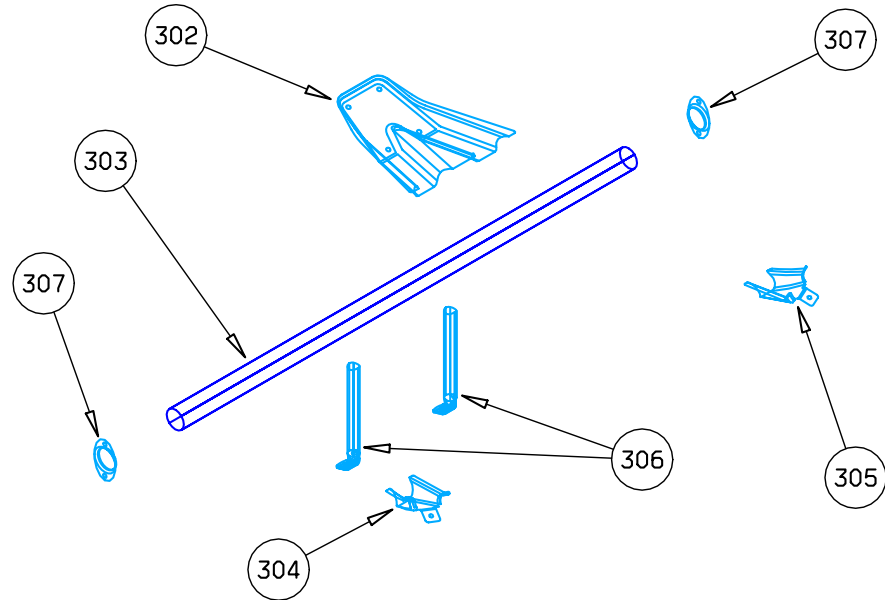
Exploded view Instrument Panel Beam illustrating steel grade
